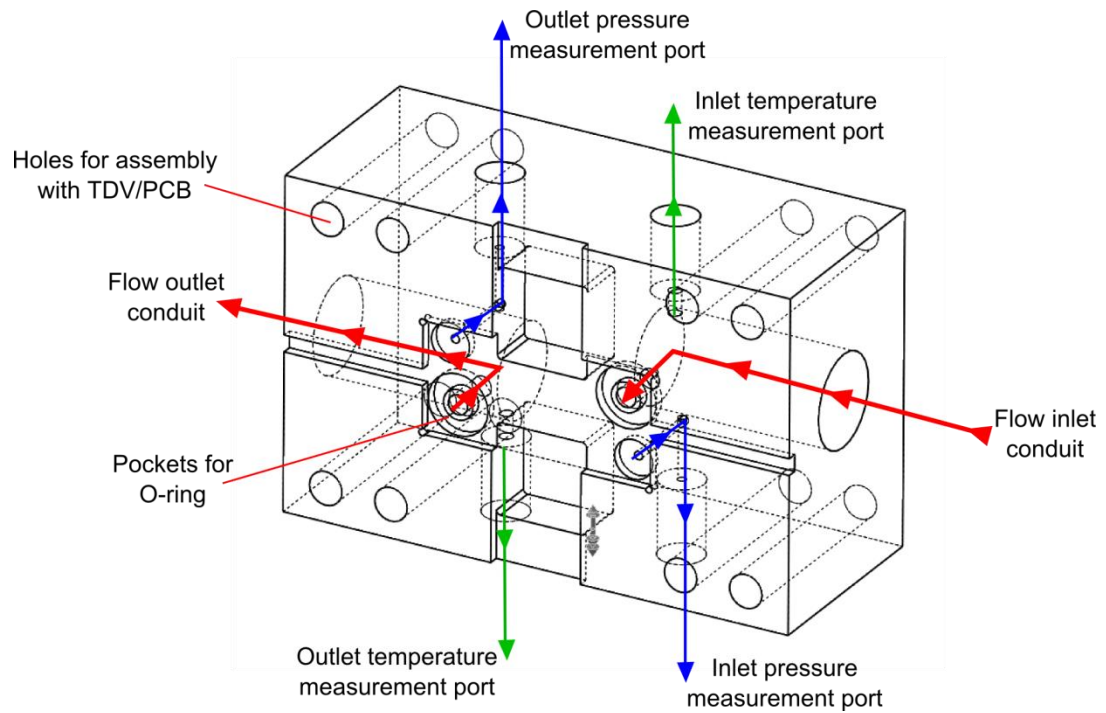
Isometric view of a CAD model for the fluidic package for test section assembly.
